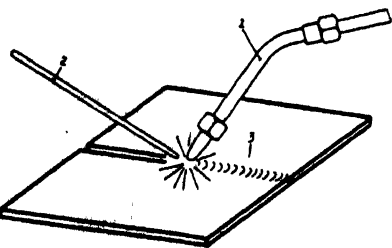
Application of the blow-pipe in oxy-acetylene welding.
